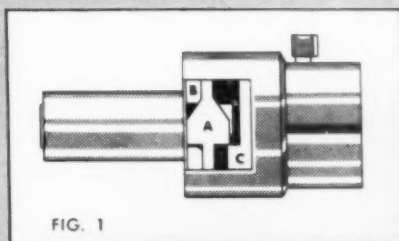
The clutch slightly engaged at C at start of threading operation.
